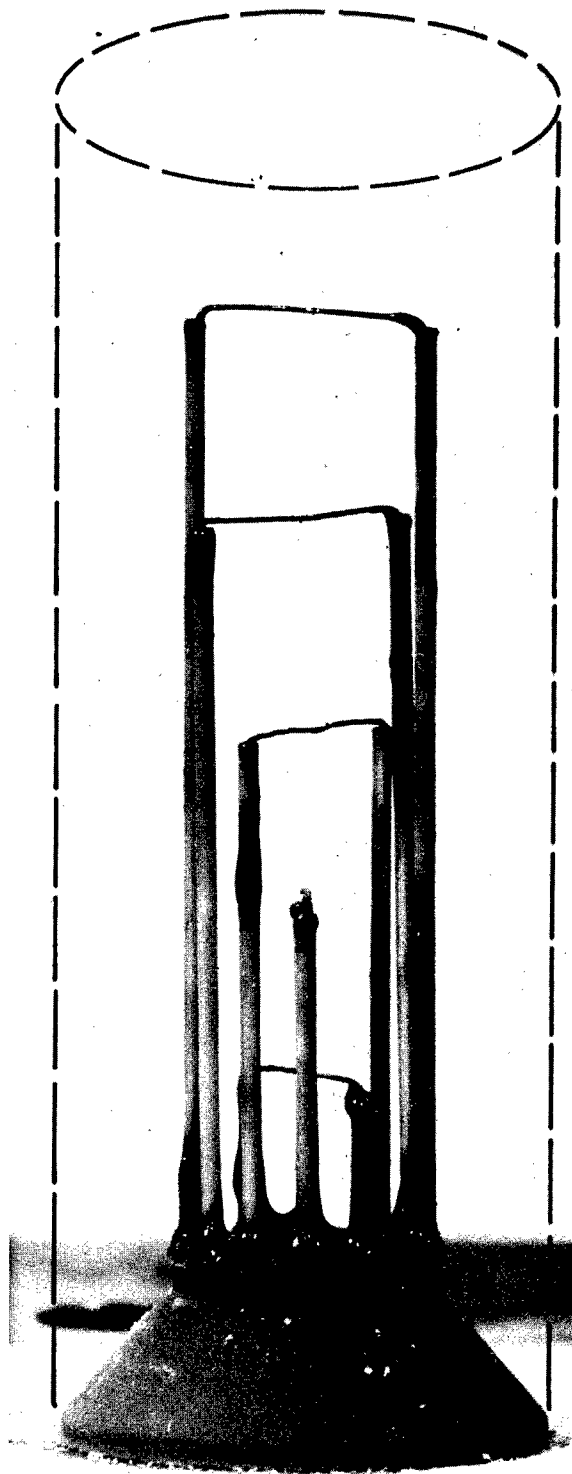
Photograph of prefabricated thermocouples for cast-in-place gauge to measure erosion (burning) rate of ablative test specimens.
